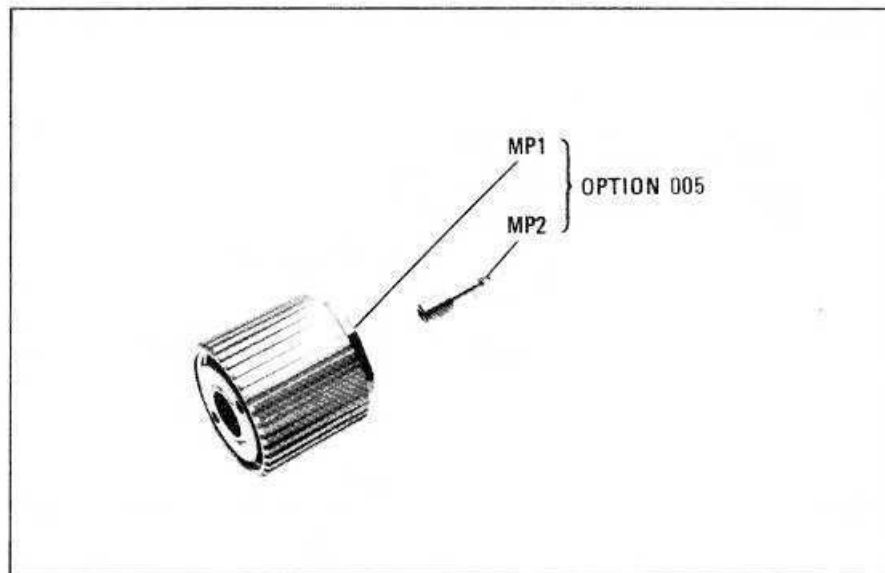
APC-7 RF Output Connector, Exploded View (Option 005)
